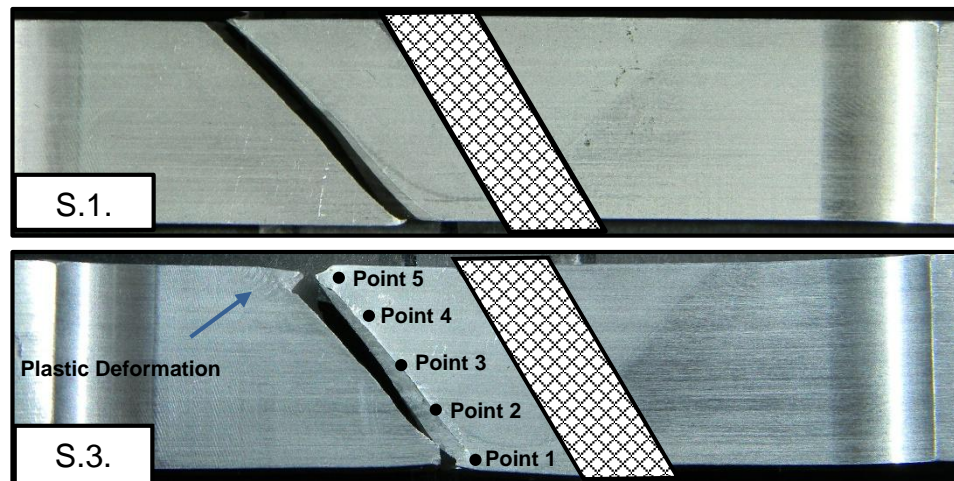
Fracture Modes of Welds S.1 and S.3
